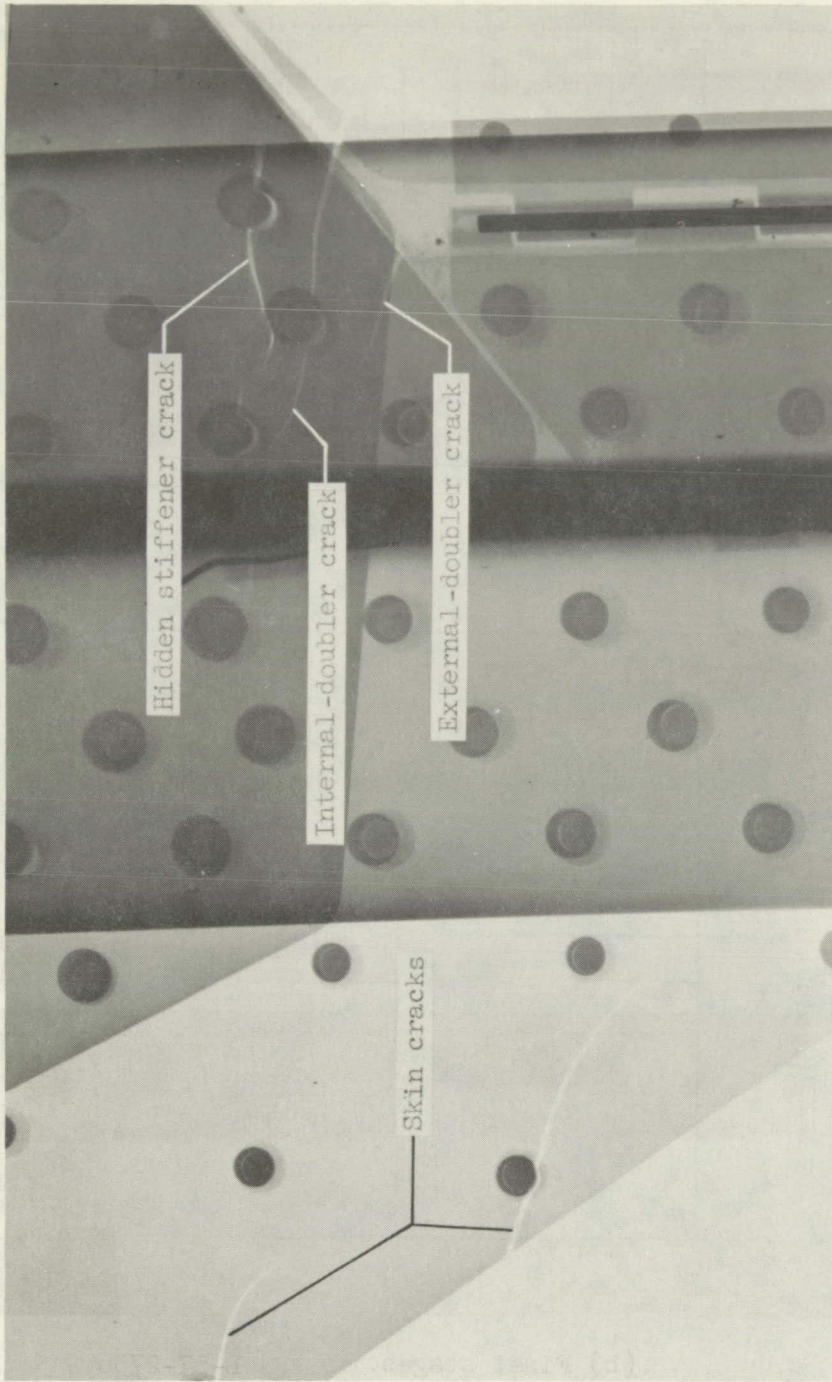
X-ray photograph of crack in corner of inspection cutout. L-57-2737
